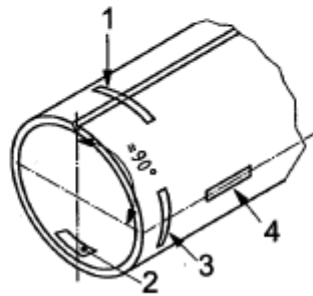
Dimensional deviations of the weld seam
